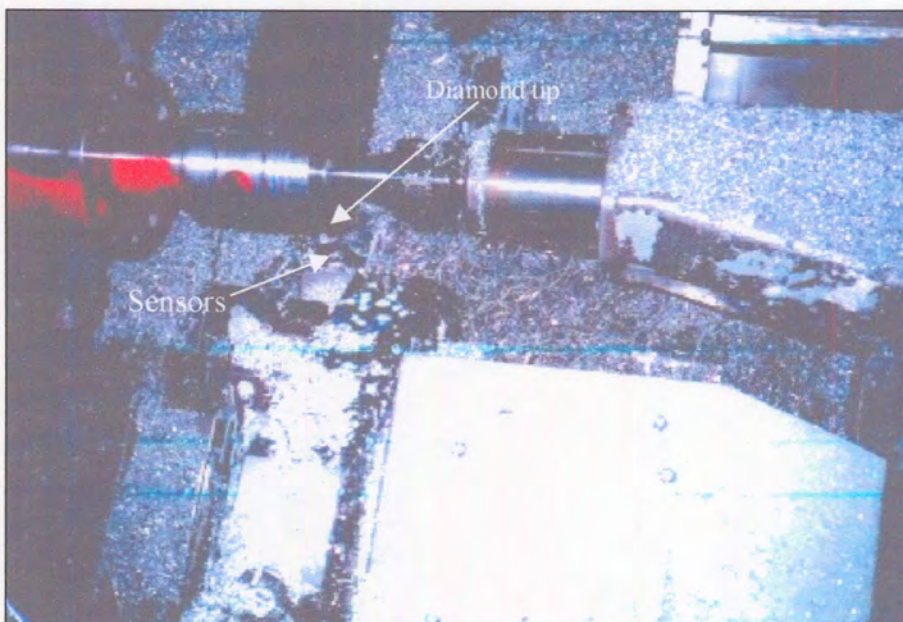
Part after machining, with sensor mounting on diamond tip visible
